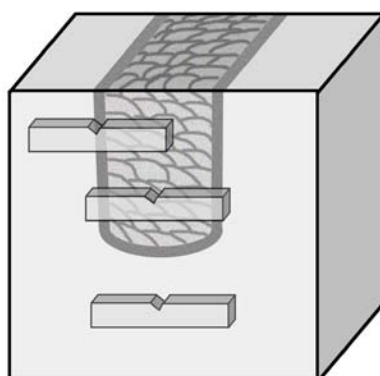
Scheme of cutting samples from a welded joint.
